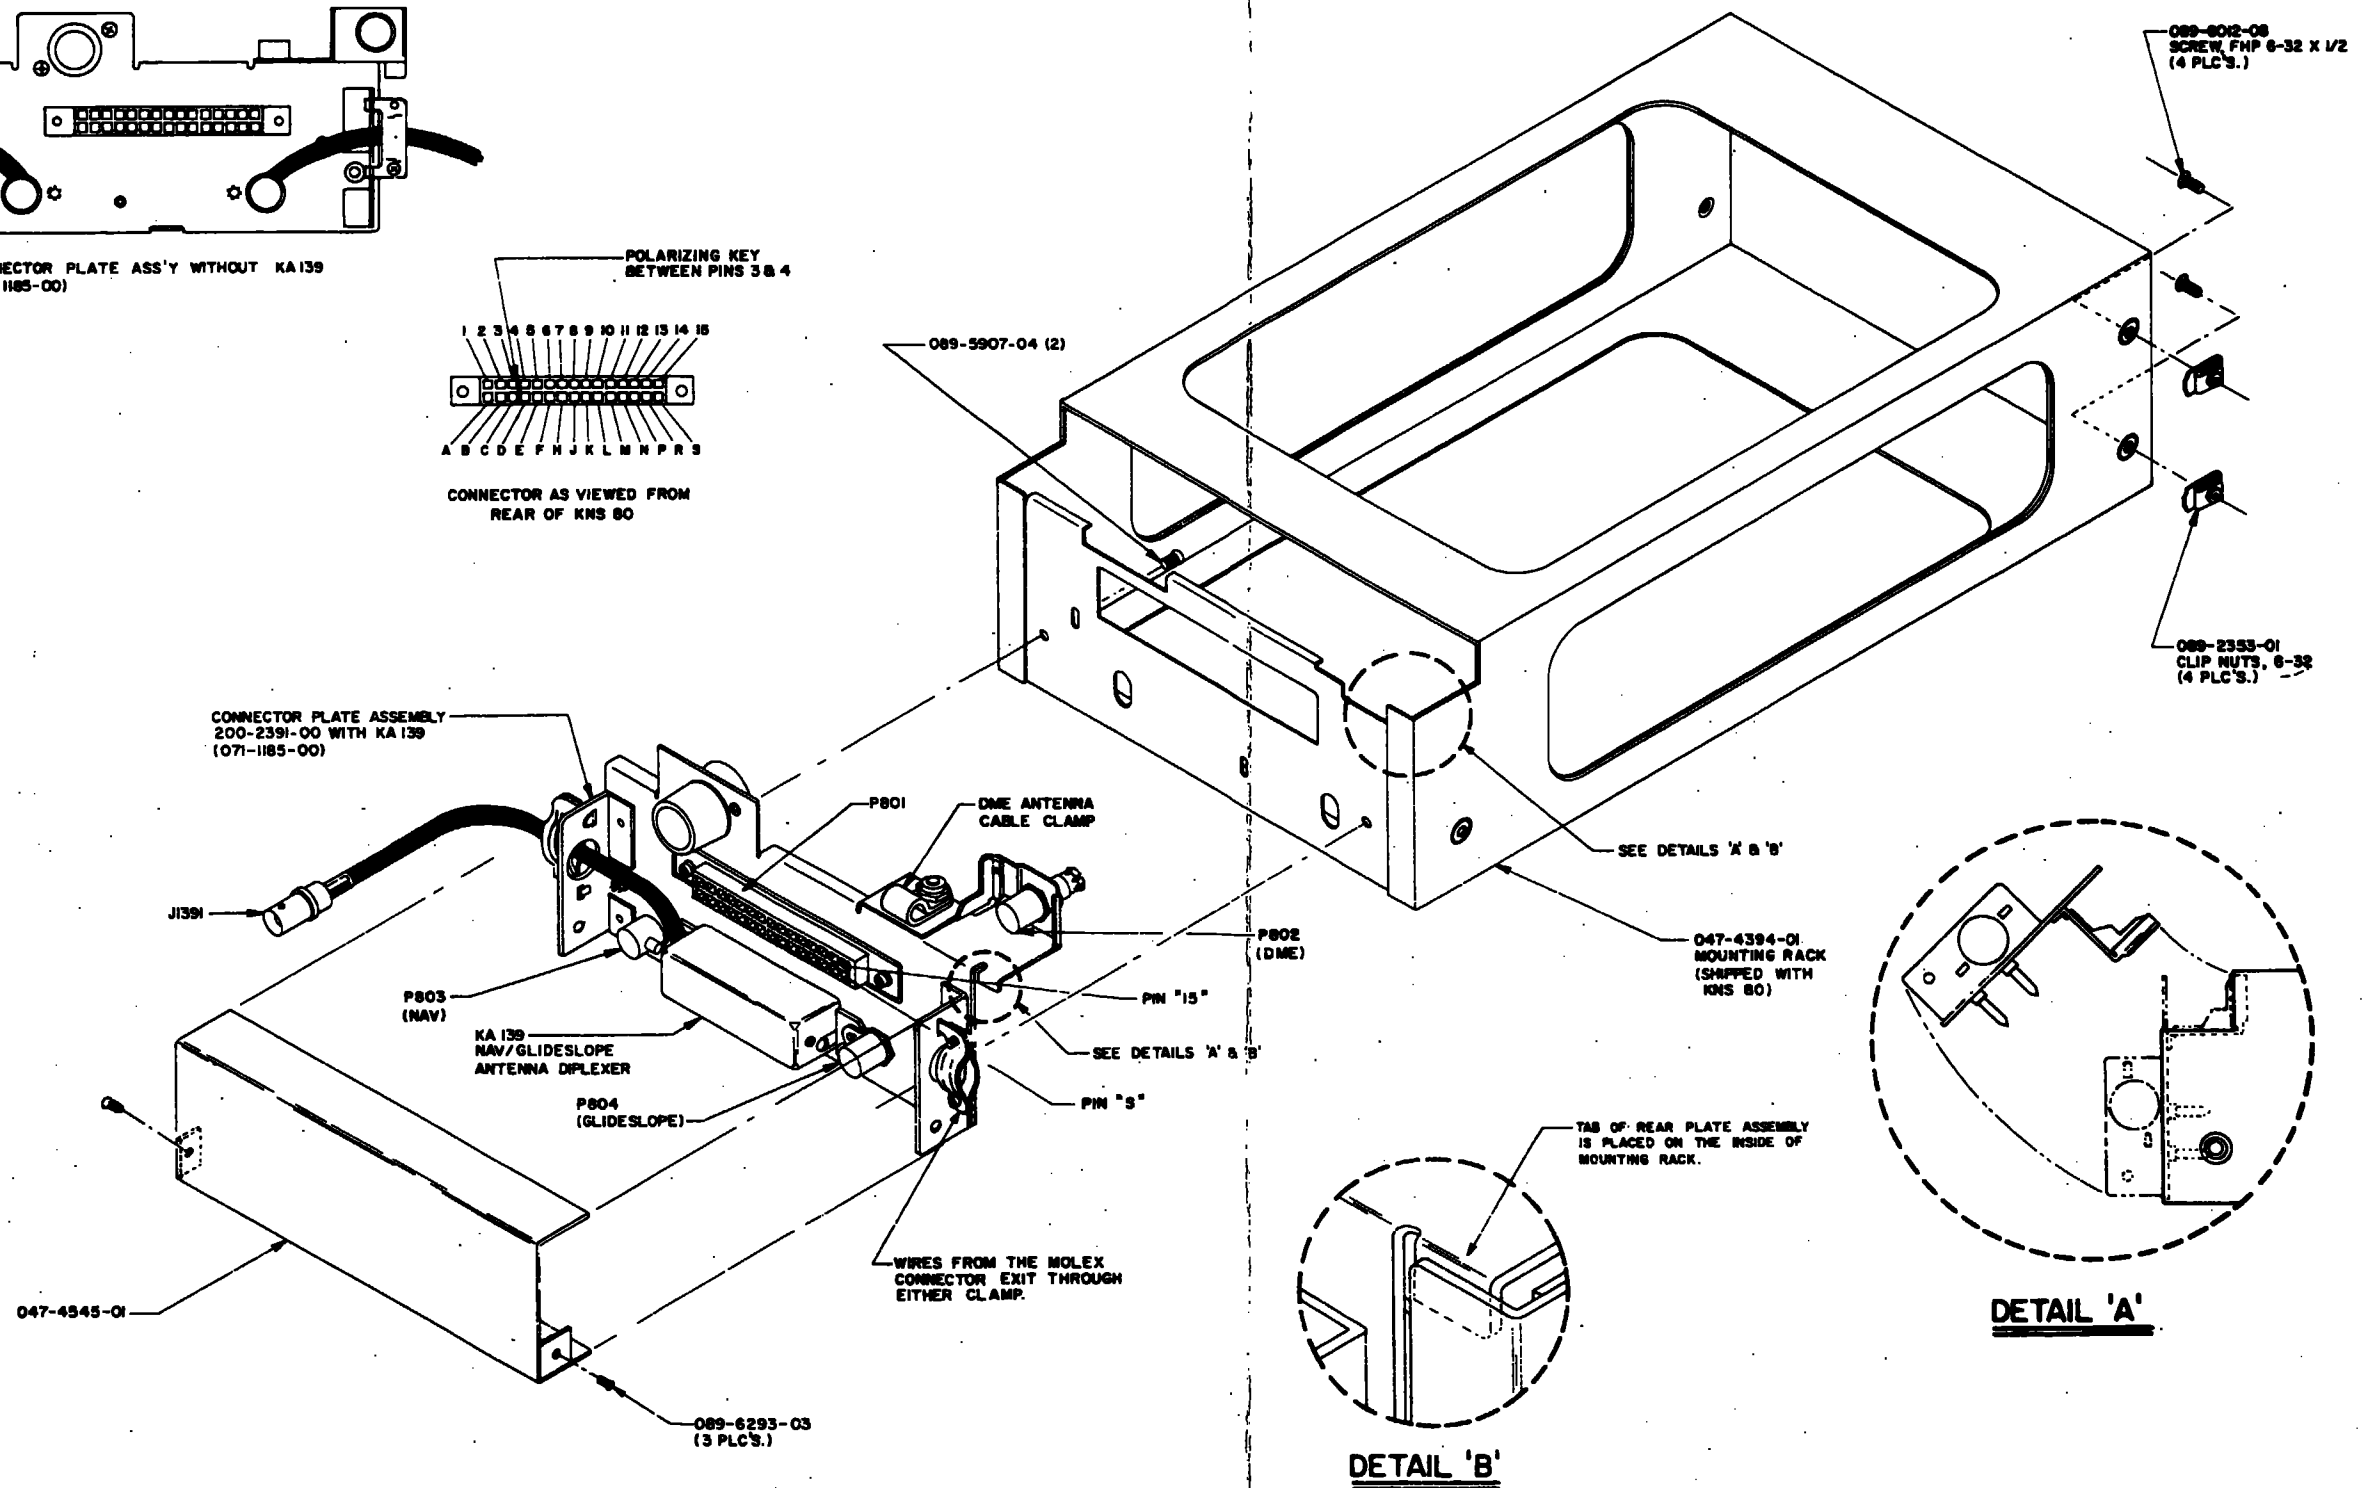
KNS 80 INSTALLATION ASSEMBLY
